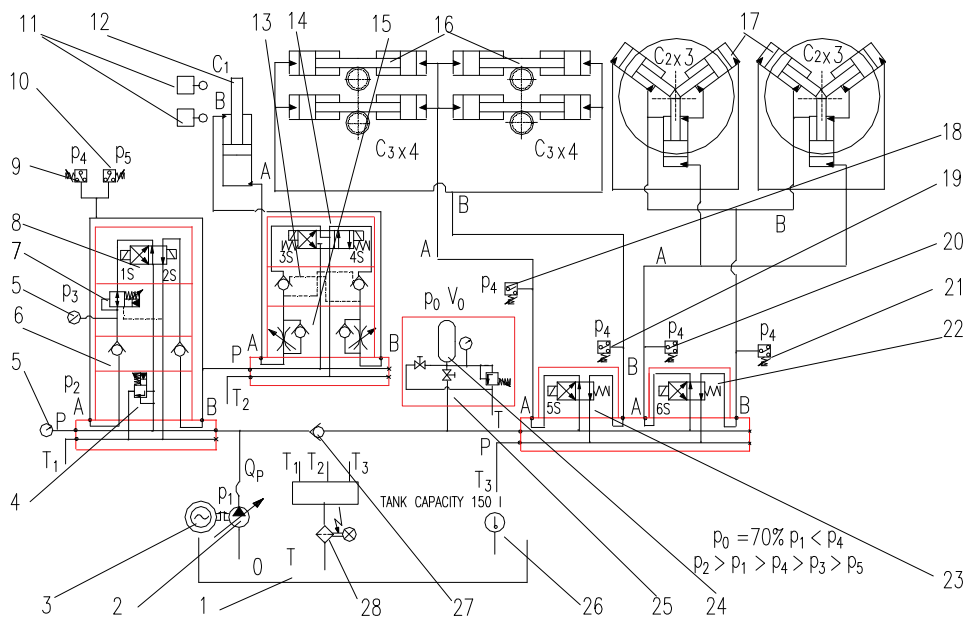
Hydraulic scheme: 1 – tank T, 2 – pump with pressure regulator, 3 – electric drive motor; 4 – pressure relief valve; 5 – manometers; 6 – double check valve; 7 – pressure reducing valve; 8 – directional valve; 9, 10, 18, 19, 20, 21 – pressure switches; 11 – limit switches; 12 – cylinder C₁; 13 – check valve hydraulically operated; 14 – directional valve; 15 – throttle valve; 16 – actuation cylinders of blocking clamps C₃; 17 – actuation cylinders of jaws C₂; 22, 23 – directional valves; 24 – accumulator; 25 – safety block; 26 – electronic temperature transmitter; 27 – check valve; 28 – return filter; 1S ÷ 6S – electromagnets; p₀–p₄ – adjusted values of the pressures.
